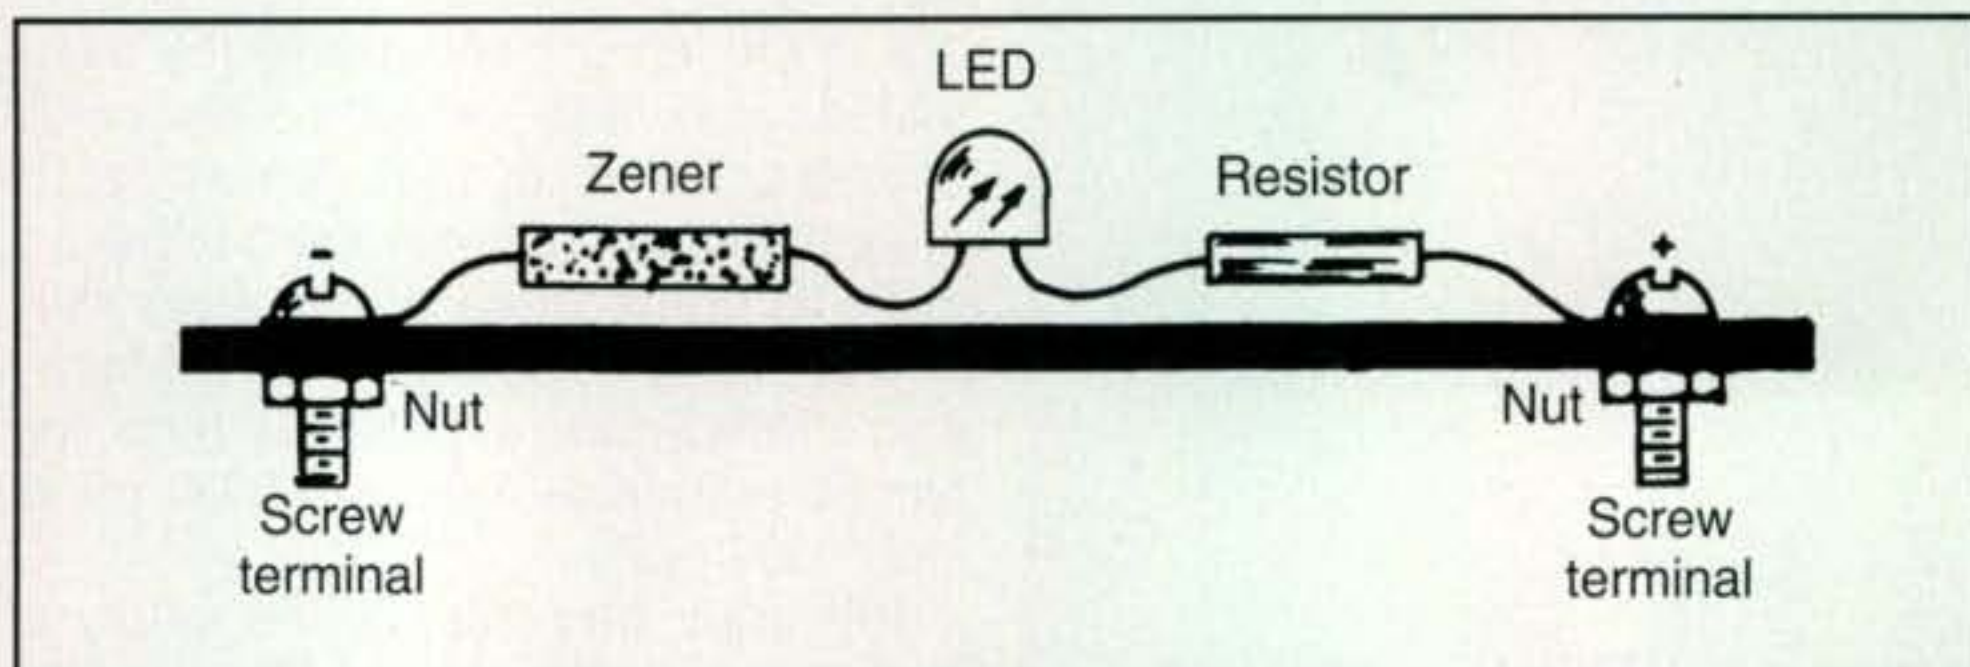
Assembly outline for homebrewing your own handheld transceiver battery checker as discussed in the text. Regular coaxial sockets often include diodes that isolate battery connections, so mounting the parts on a small piece of perf-board with screws to mate with the bottom/rapid-charge terminals on the battery pack is often necessary.
